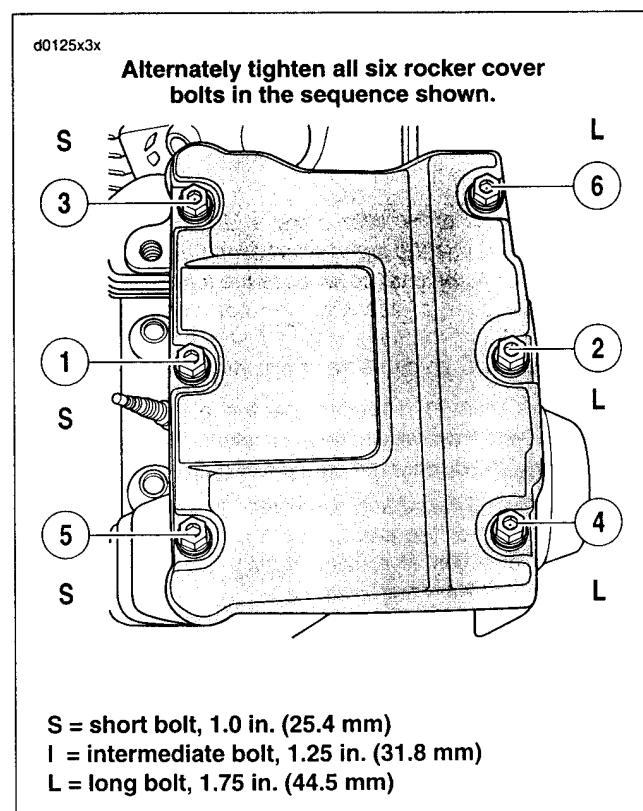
Rocker Cover Bolts Torque Sequence (Rear Cylinder Shown)
